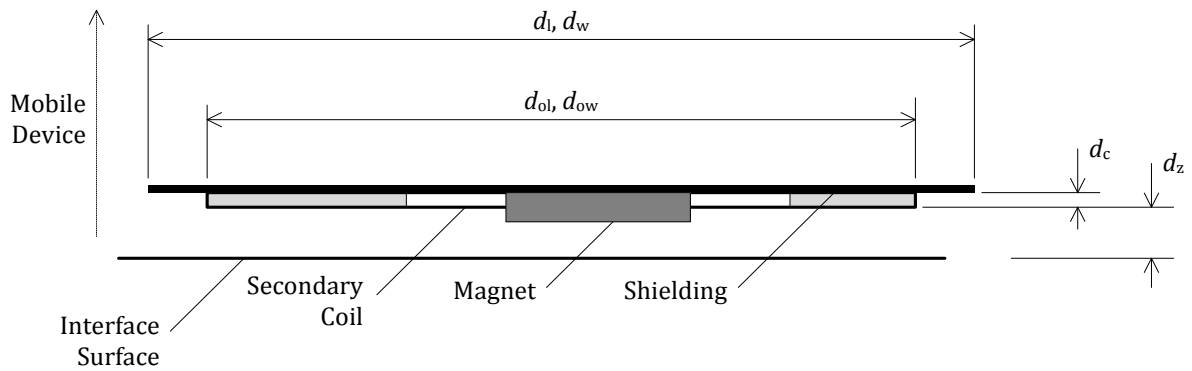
Secondary Coil and Shielding assembly of Power Receiver example 1
